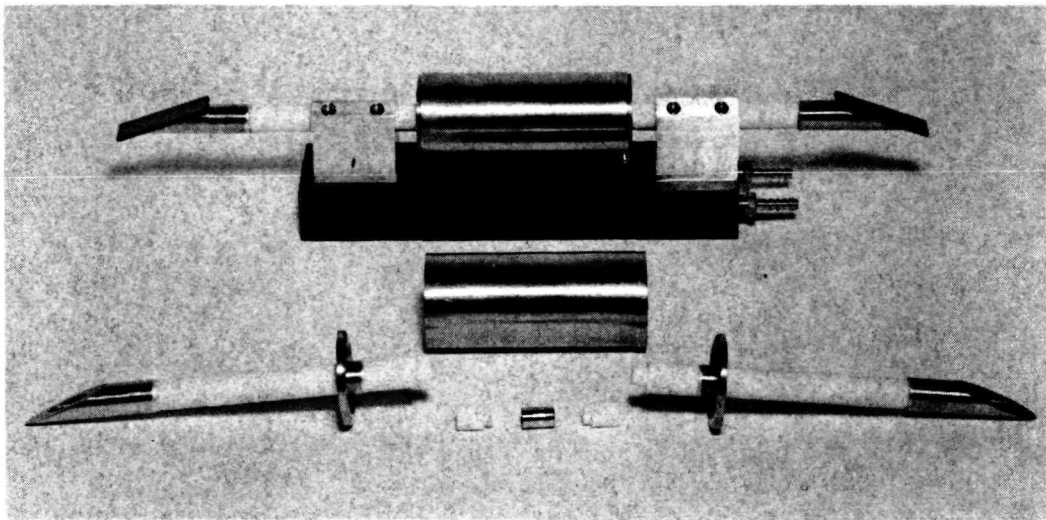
Exploded View of Metal-Ceramic Discharge Tube.
